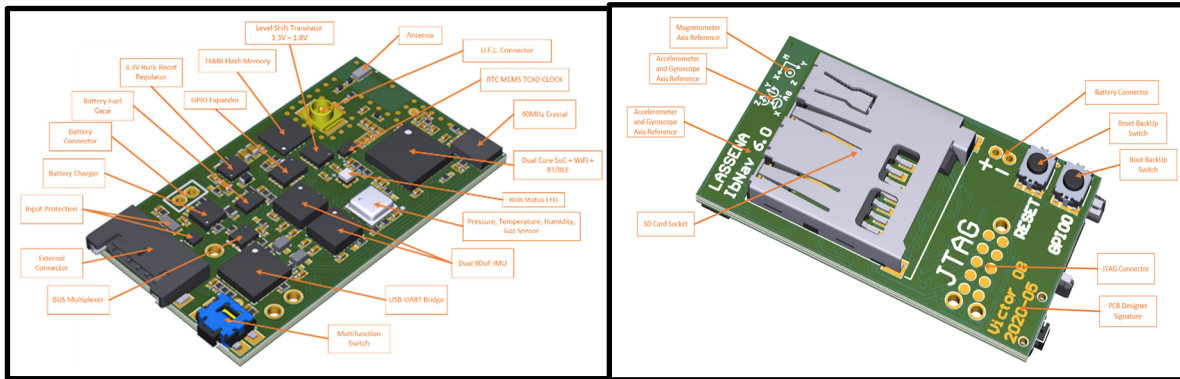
PCB Design of ibNav 6.1 Sensor
